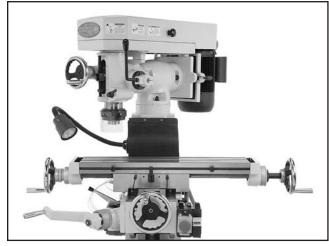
Head tilting locking hex nuts (2 of 4 shown).
